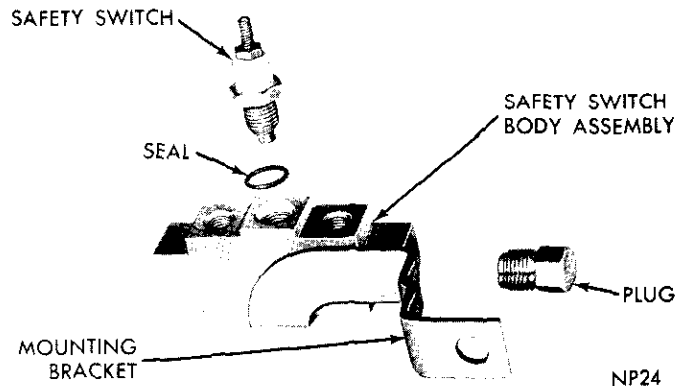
Hydraulic System Safety Switch (Exploded View)
